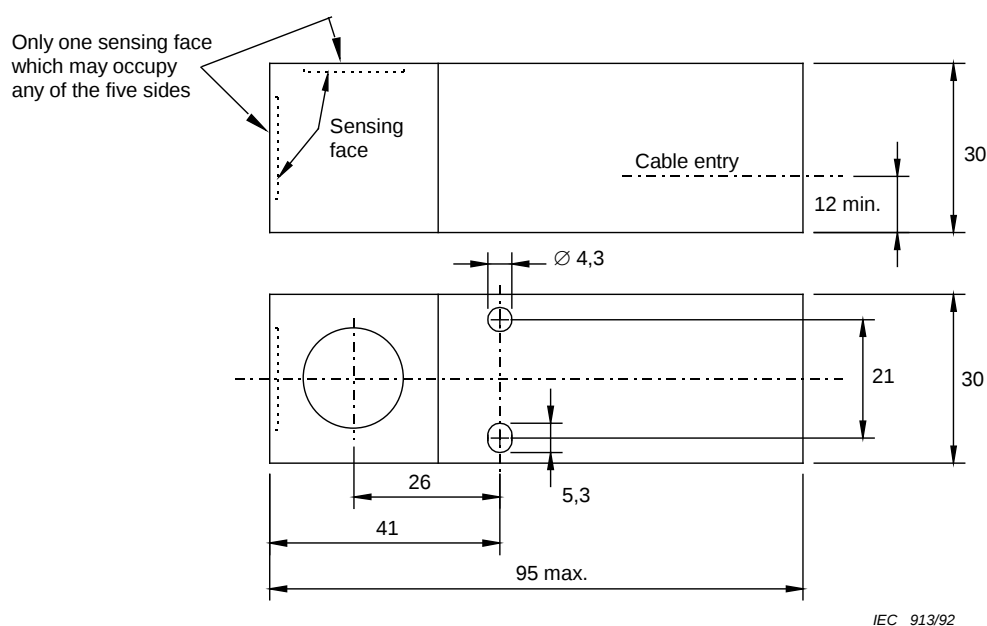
(CC) a – Dimensions, type C30 in millimetres
